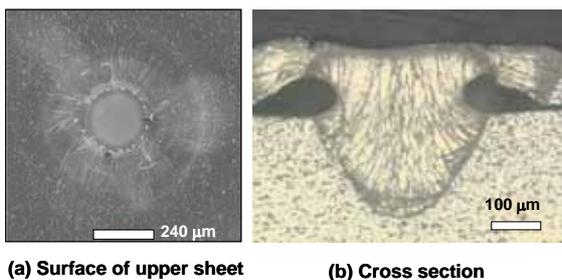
Surface and cross section of a laser micro-spot weld in A3003 alloy.
